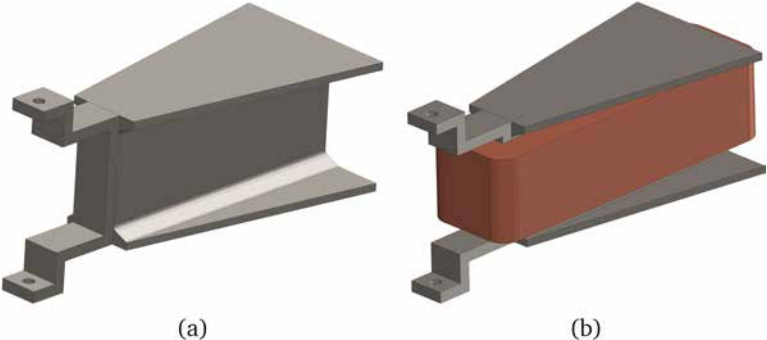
The stator tooth assembly of SAT PMBLDC motor. (a) A stator tooth with a tooth holder. (b) An assembly of a wound stator tooth.
